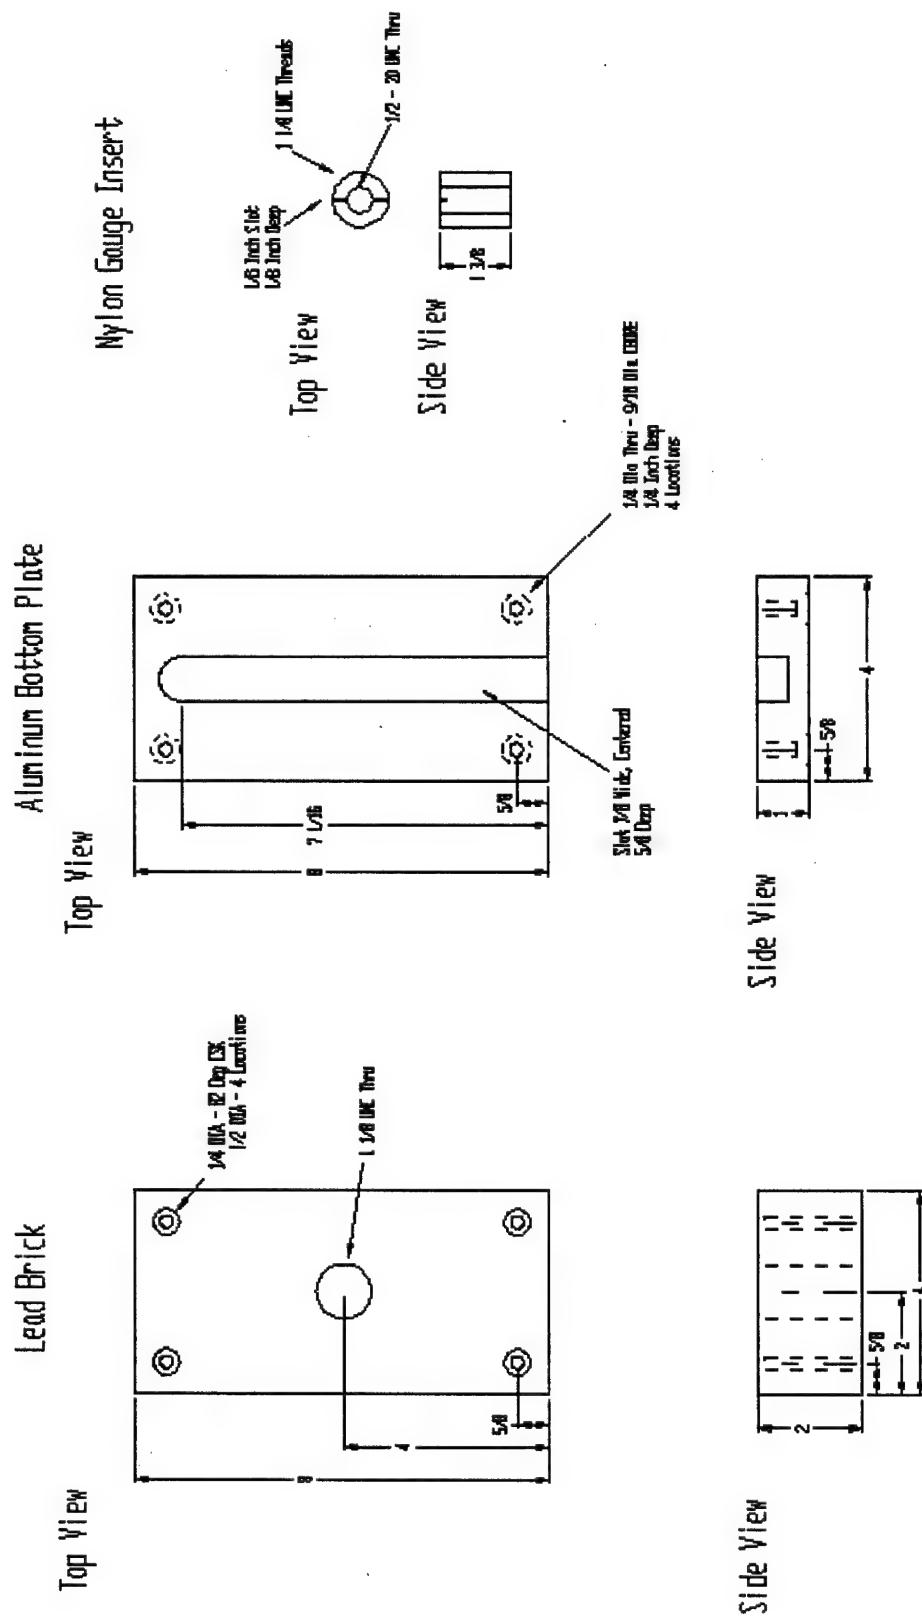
Engineering drawing of lead "pig" pressure transducer mount.
